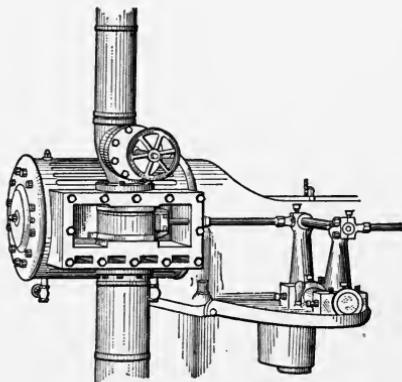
American-Ball Engine Cylinder and Steam Chest.
